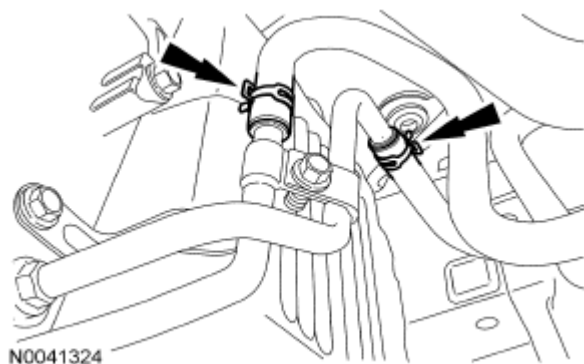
Locating Transaxle Cooler Hoses Clamps
